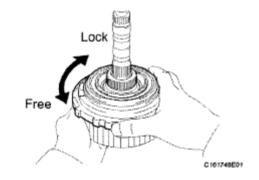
Holding Rear Planetary Ring Gear Flange And Turn 1-Way Clutch
